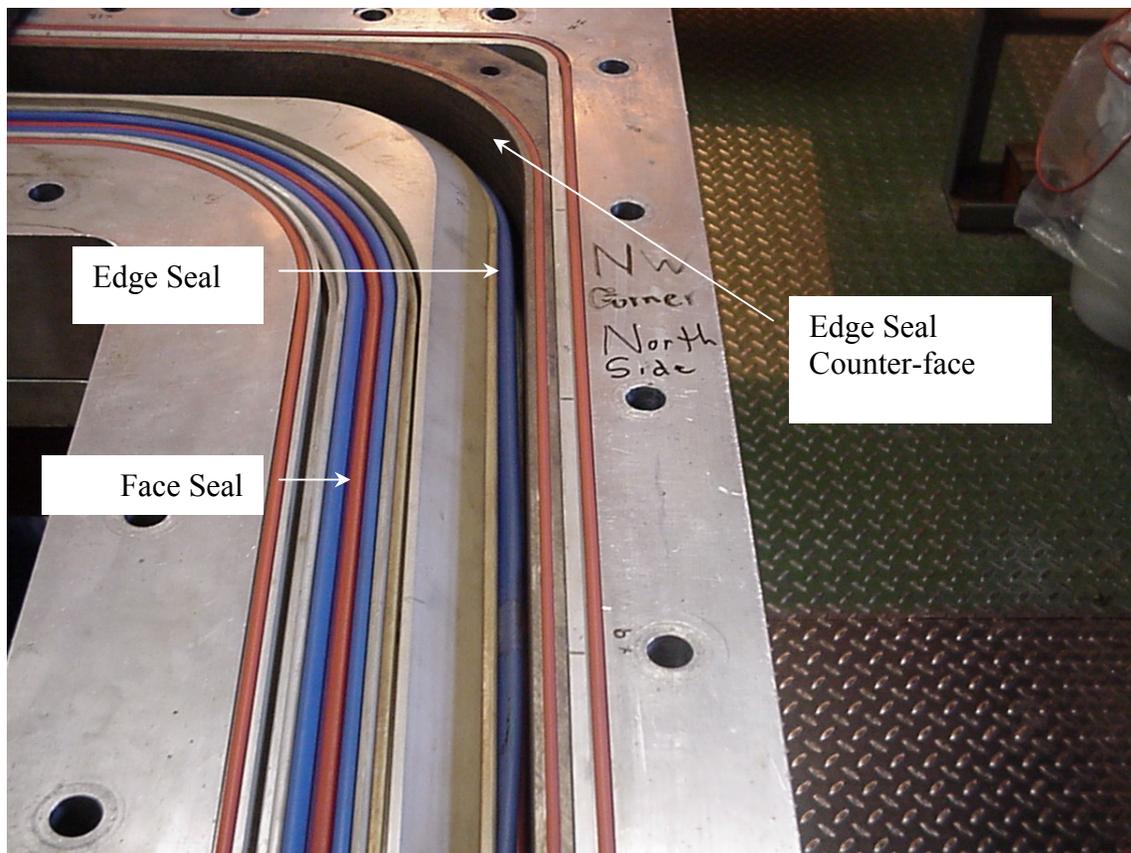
Edge Seal Shown Partially Un-seated Following a Maximum Cross-seal Pressure Test
